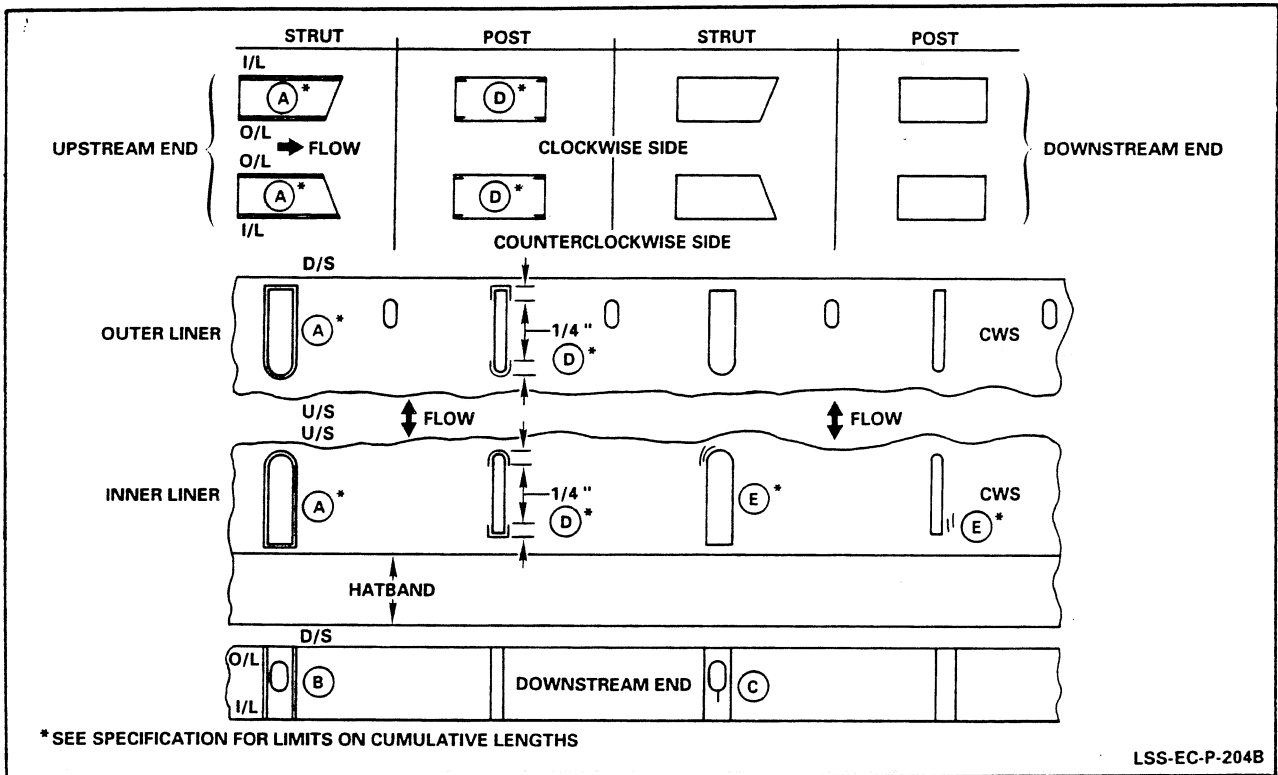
HPFTP Turbopump Housing Damage Definitions
